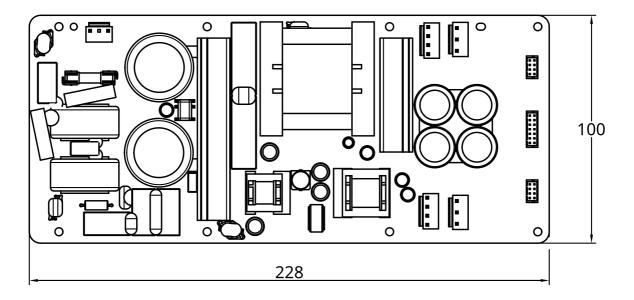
ICEpower 1000S Nominal mechanical dimensions
